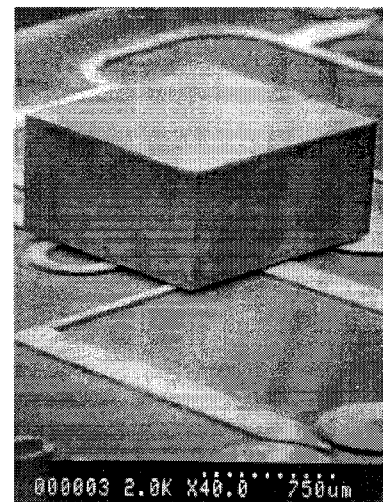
SEM photograph of a Si die flip-chip mounted to a Duroid circuit board. The circuit board contains transmission lines and other distributed elements. This chip is  $1300 \times 1300 \times 750 \mu\text{m}^3$ .
